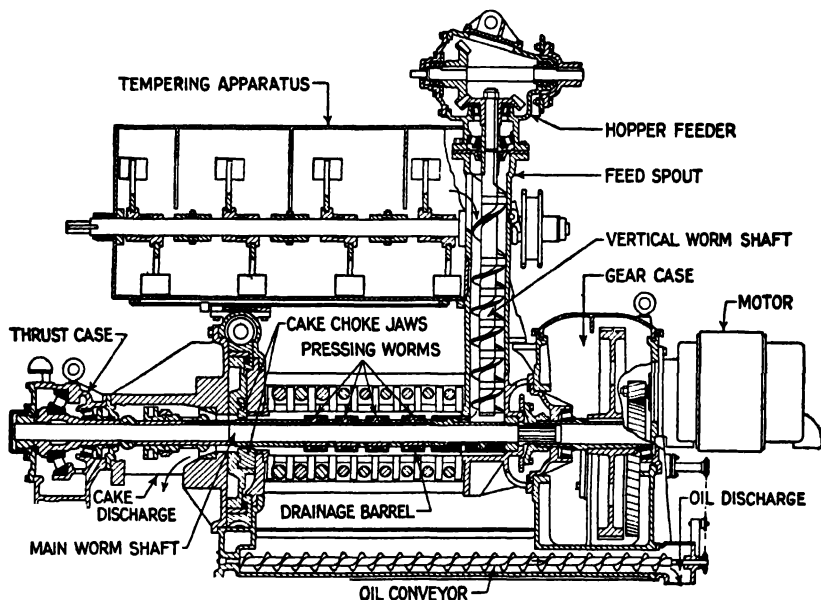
Anderson Expeller Mill. Courtesy V. D. Anderson Company, Cleveland, Ohio.
